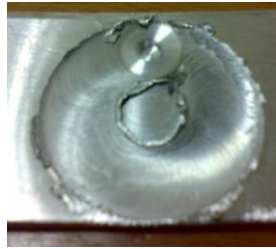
Formation of the welding (penetration 1.6mm)
